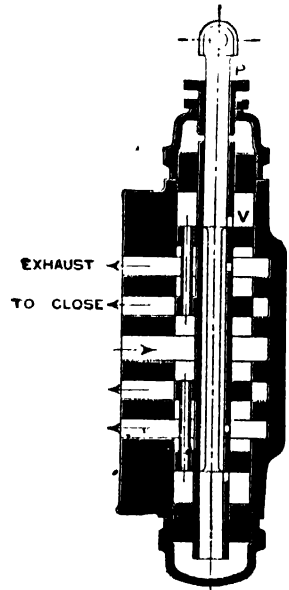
Balanced Regulating Valve for Servo-motor Cylinder
